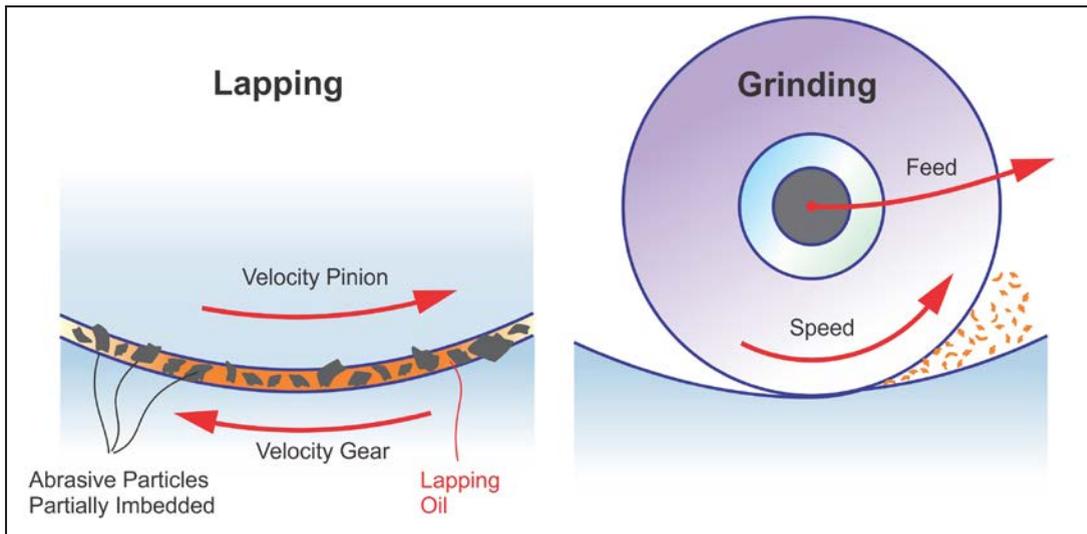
Material removal mechanism: (left) lapping; (right) grinding.
